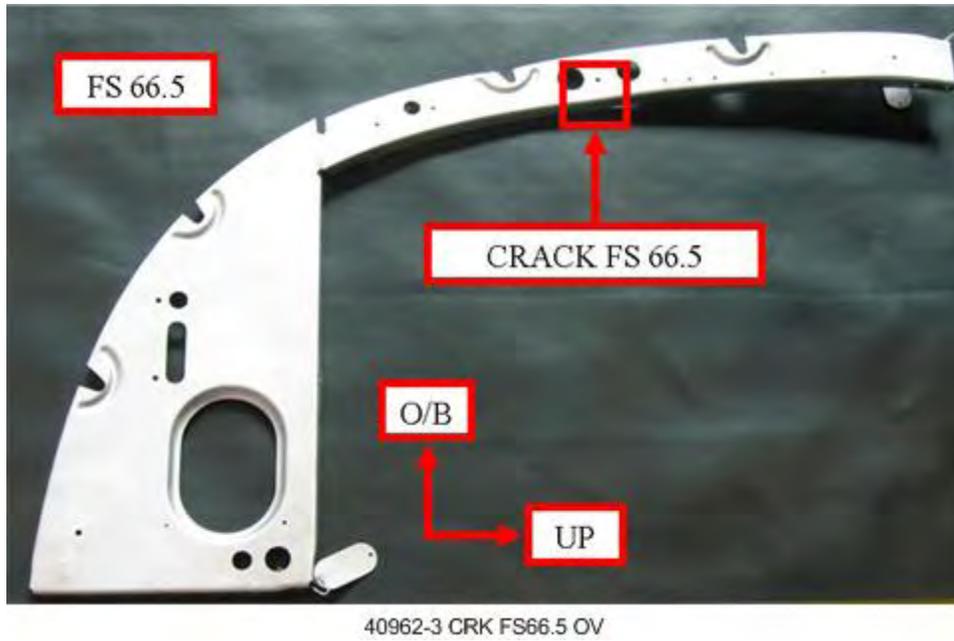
Location of Crack on the Fuselage Bulkhead Assembly FS 66.5
